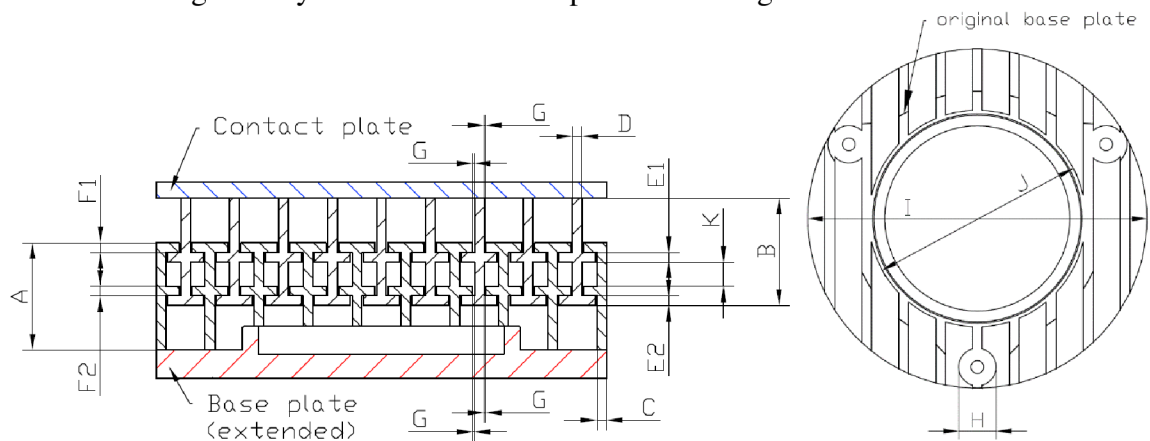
T-shape contact geometry definition side view (left), top view on lower part (right)
